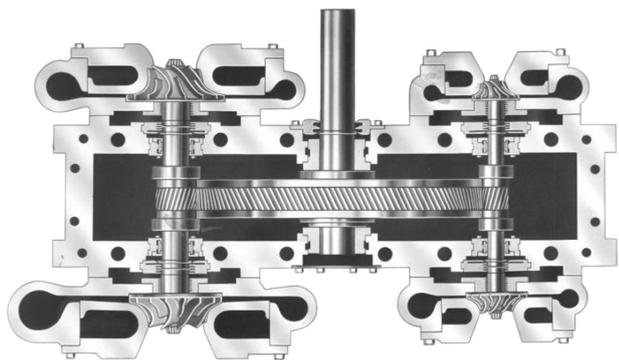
This figure shows the top view of an Ingersoll Rand MSG integrally geared centrifugal (IGC) compressor with cross-section taken at the horizontal split line of the compressor gearbox (the approximate plane at which the input shaft enters the gearbox).
